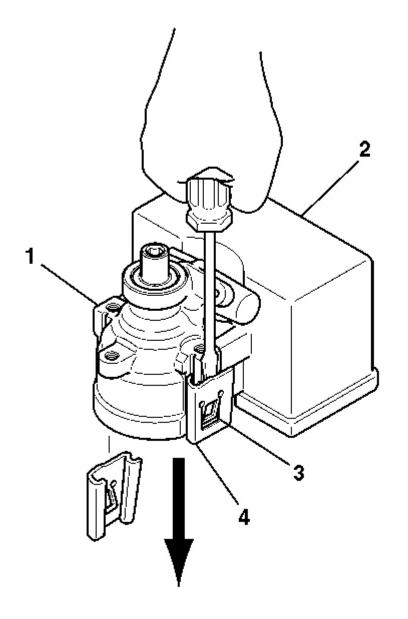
View Of Power Steering Pump & Reservoir (CB Series) Courtesy of GENERAL MOTORS CORP.
